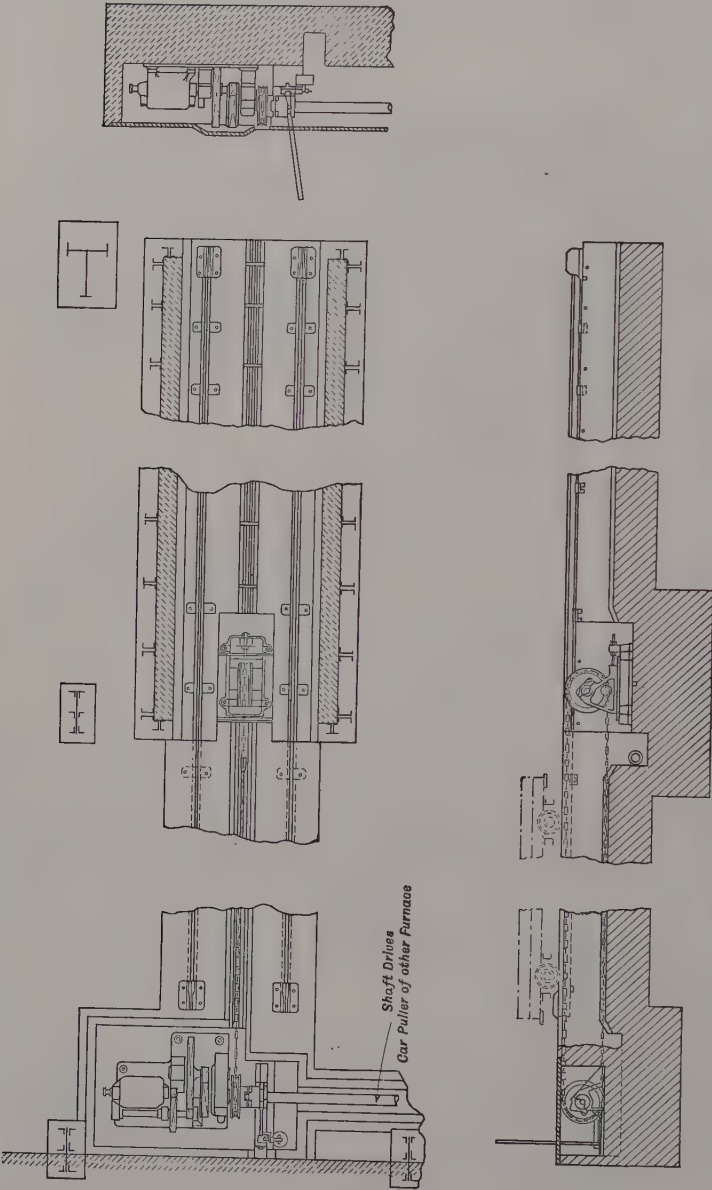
Car puller operated by reversible electric motor. Chain pulley is connected to driveshaft by jaw clutch.
